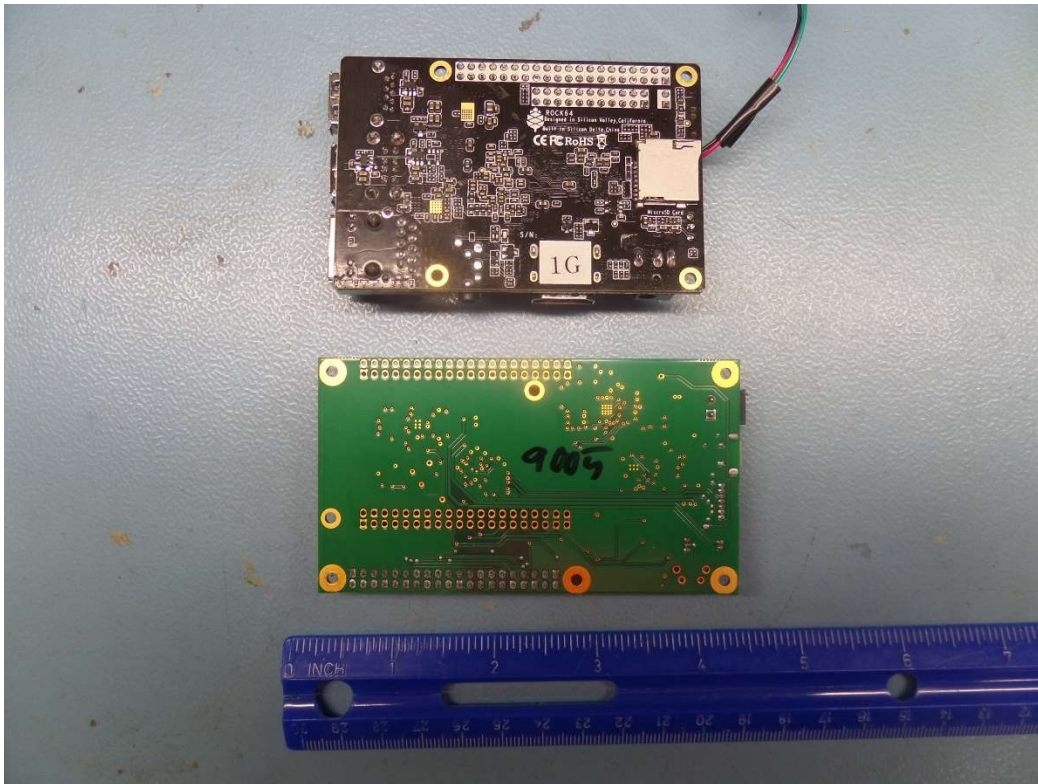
NS40 antenna SOM module Rock 64 & Light and sounder board bottom side
